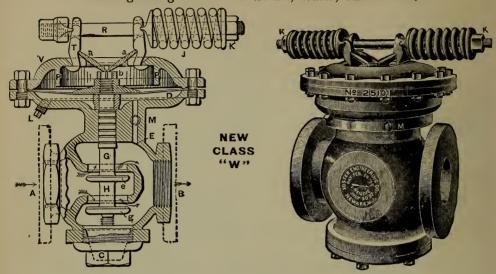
SECTIONAL VIEW OF 1-2 TO 2 IN.
